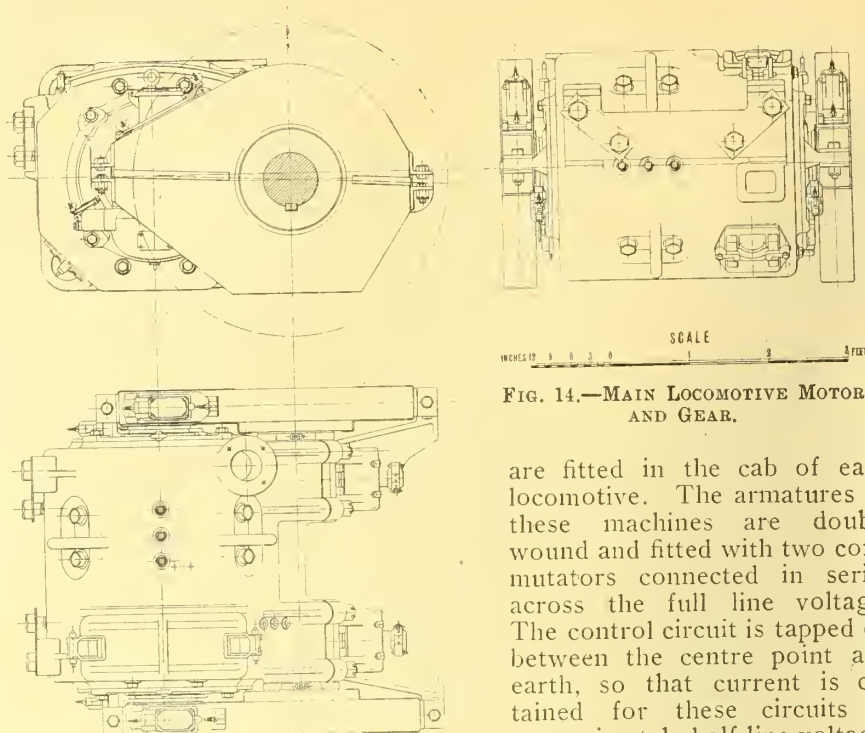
MAIN LOCOMOTIVE MOTOR AND GEAR.
